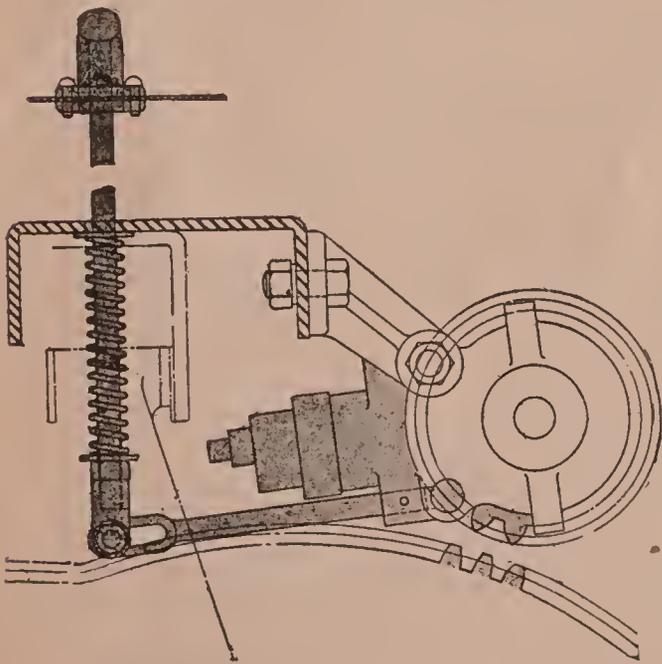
On the Pullman Cars, the Air Pump Hangs Below and to One Side of the Flywheel. When Needed, a Rod Pulls It Over So That Its Gear Meshes with Teeth on the Rim of the Flywheel.
